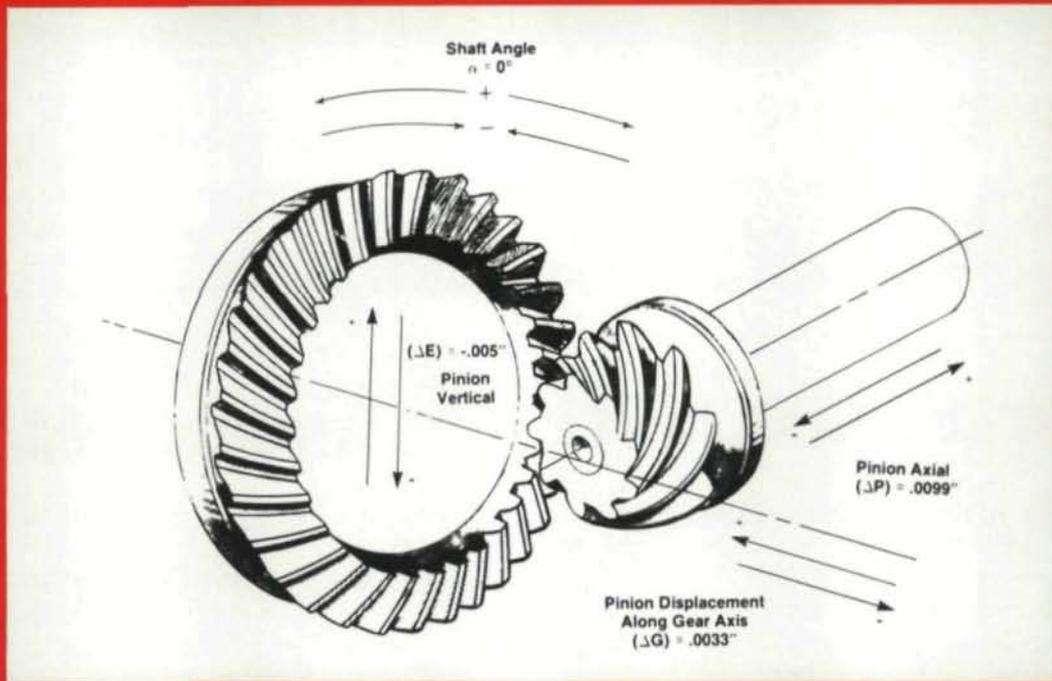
Displacement of pinion member relative to gear member at 36,500 lb.-in. gear torque
